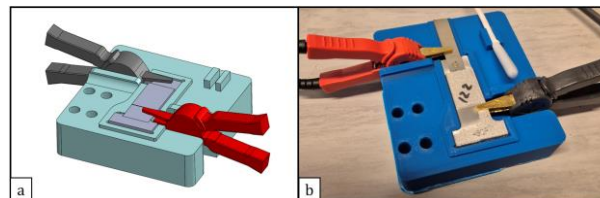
Resistance measuring fixture, a) AM sample testing, b) Measurement of welded sample
